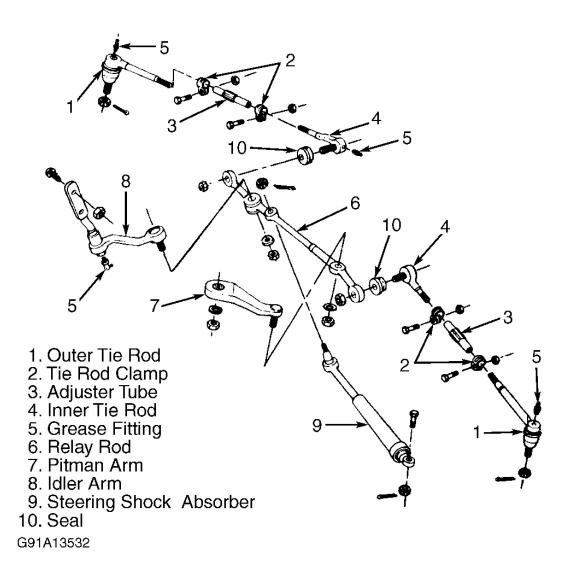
Exploded View Of Steering Linkage (4WD) Courtesy of GENERAL MOTORS CORP.
